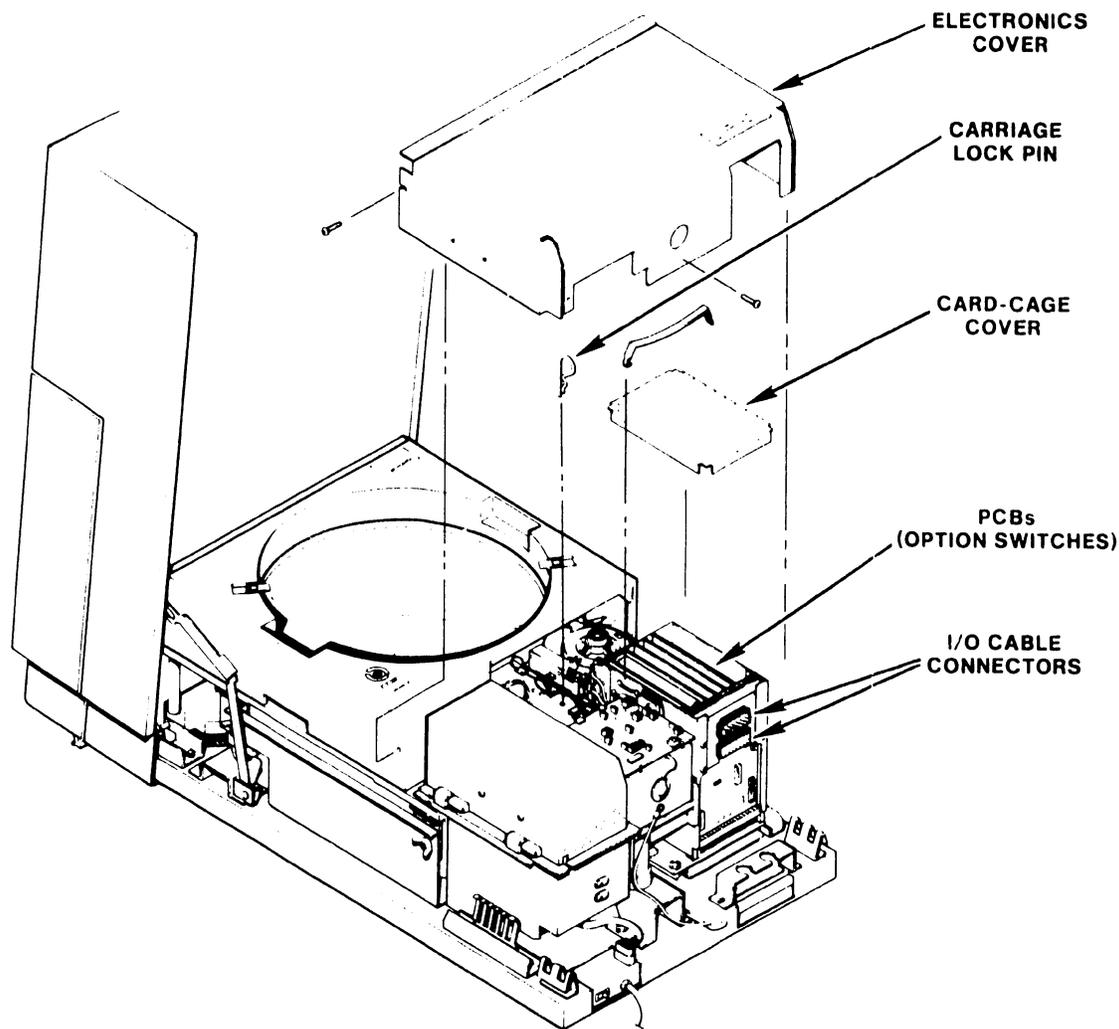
INSPECTING THE HAWK DISK UNIT
